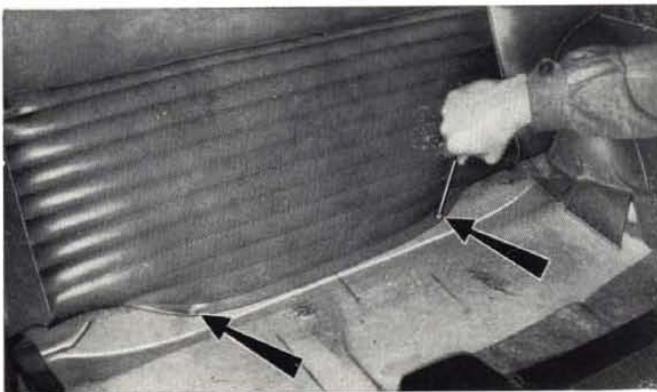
Removing rear seat back rest. Arrows point to back rest holding screws.
